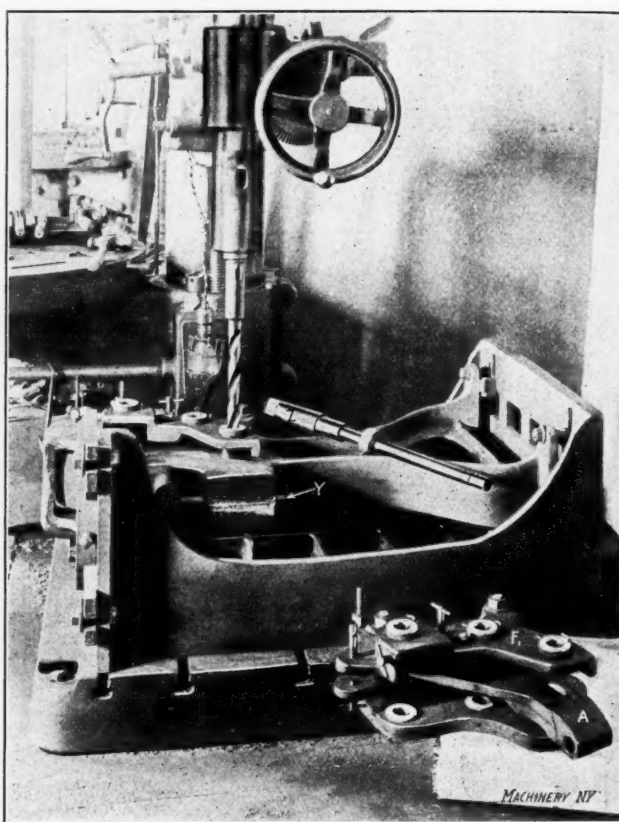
Drilling, Reaming and Counterboring the Bearings for the Gears
